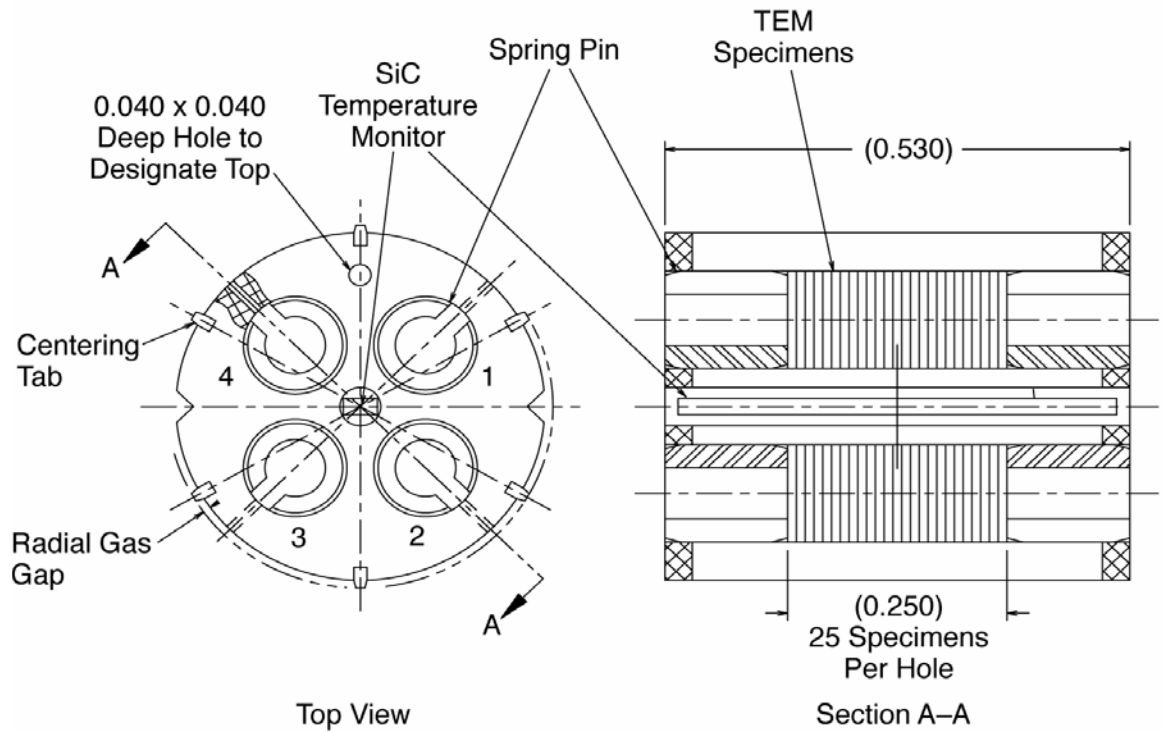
Specimen holder subassembly used in JP-26 for TEM specimens.
